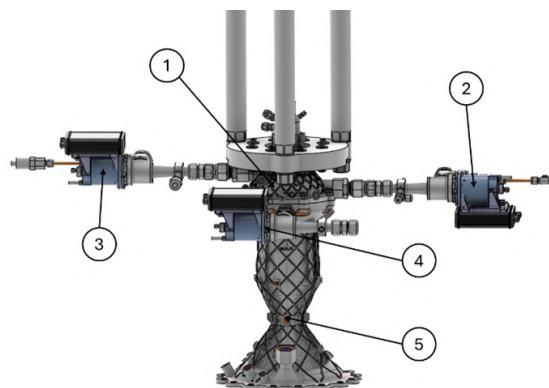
Test article involved in the third iteration of the Huracan thrust chamber assembly (TCA): Injector Head (IH), 2) Main Fuel Valve (MFV), 3) Main Oxidizer Valve (MOV), 4) Regenerative Cooling Valve (RCV), 5) Main Combustion Chamber (MCC)
